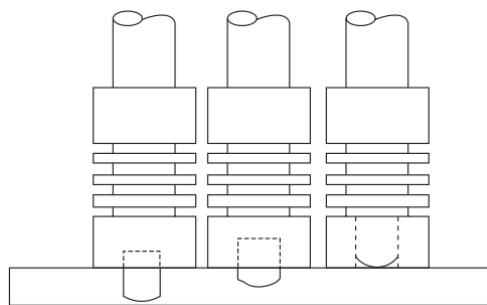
Adjustable-pin closing out pin hole [2-3]
